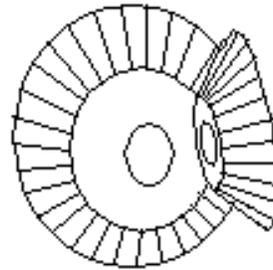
A pair of bevel gears (Retrieved from <http://www.cs.cmu.edu>)
